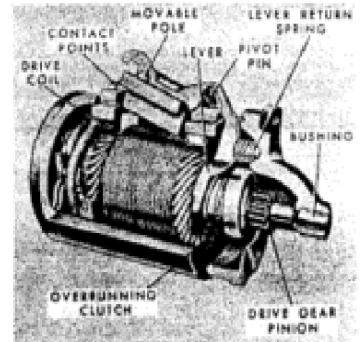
Cut-away view of starting motor used on models 2000, 3000 and 4000 with non-diesel engine. A similar starting motor is used on some model 3000 with diesel engine.
